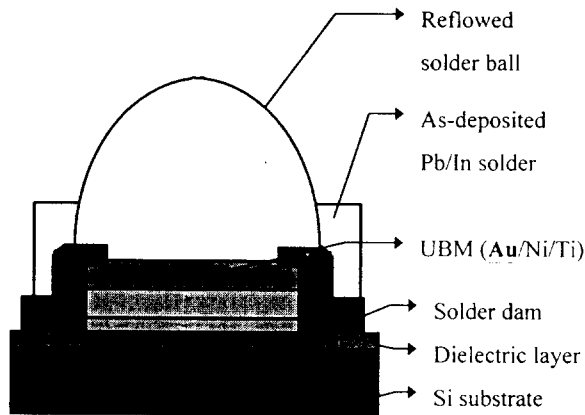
The schematic diagram of the UBM, as-deposited solder and reflowed solder ball.
